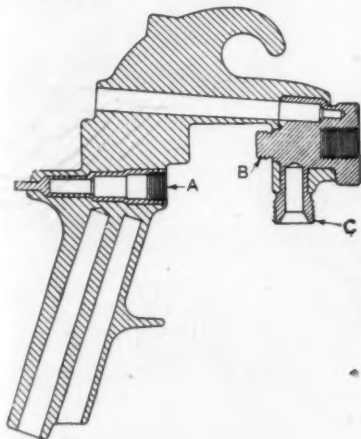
The finished die-casting which forms the body and handle of the spray gun
